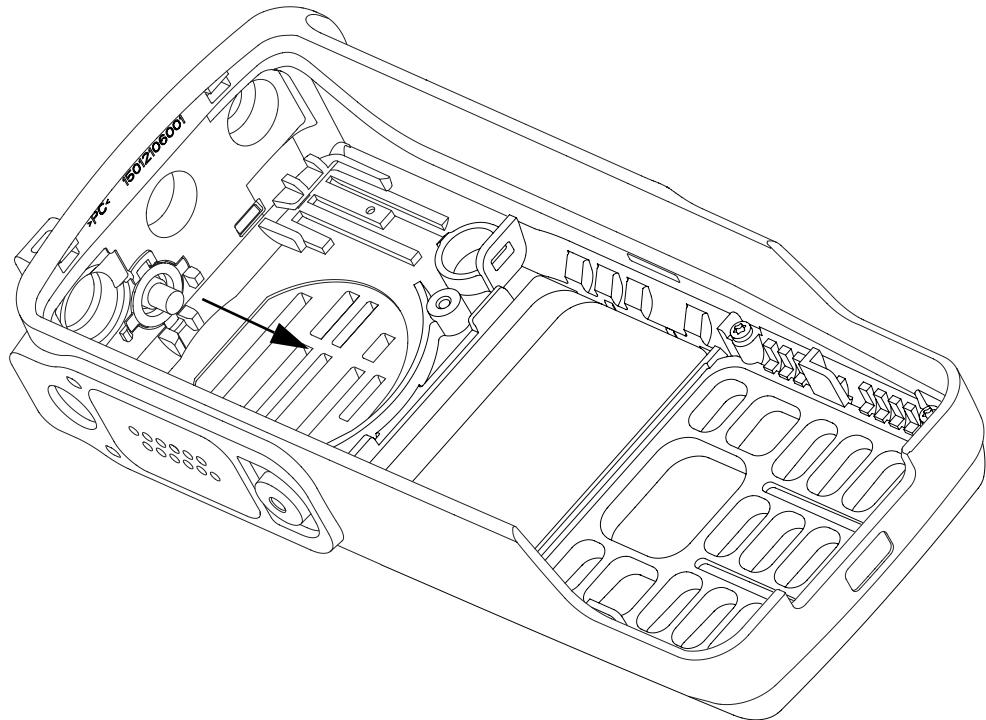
Emergency Button disassembly for Full Keypad Model
